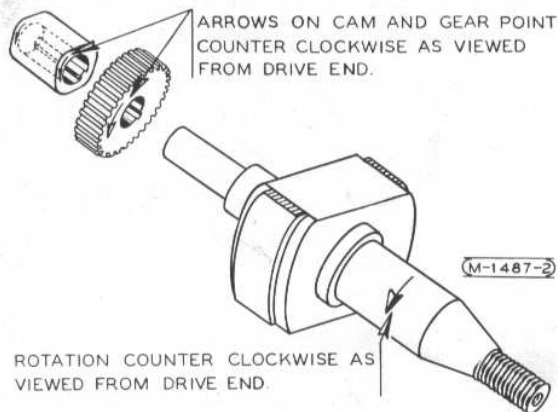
B. Correct Assembly of Cam and Gear to Magnet—Anticlockwise
